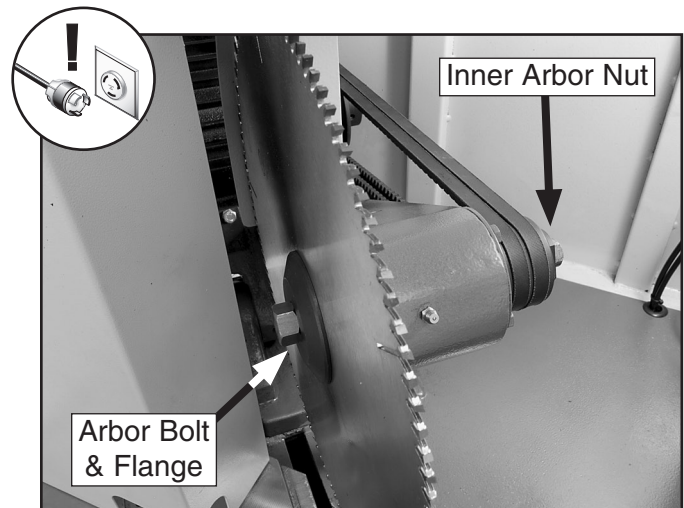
Blade arbor bolt, flange, and nut (left side shown).
